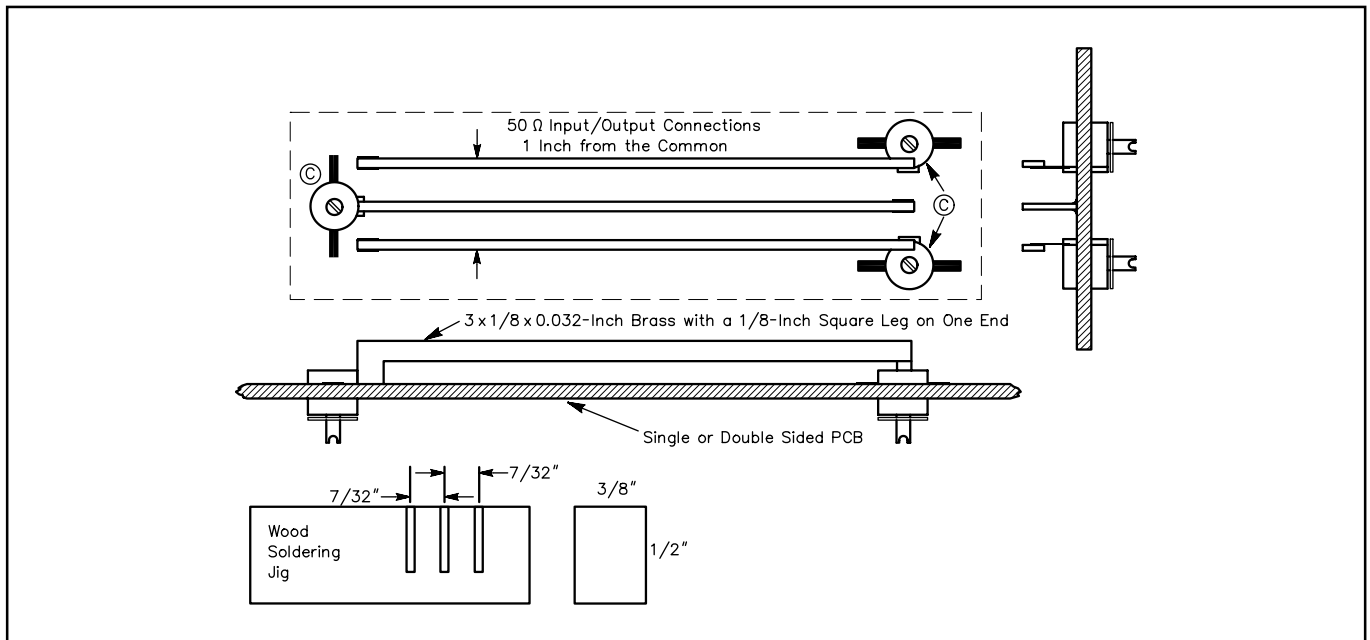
Detail of the UHF filter. The filter is easily assembled using the wood soldering jig to hold the striplines at the proper spacing while soldering. Use a $\frac{1}{8}$ -inch drill placed between the striplines and PC board to ensure proper height above the mounting surface while assembling. The jig slots are made with a hacksaw, which makes the desired 0.032-inch slot width. The devices marked C are 1.6 to 6-pF FILMTRIMS, a Sprague-Goodman plastic-dielectric capacitor (part #GYA5R000). Surplus 2.4 to 9-pF ceramic trimmers also worked well. The local oscillator filter is the same except the input stripline is 1.5 inches long rather than 3 inches long, and the related capacitor, C9, is increased to 10 pF (#GYA10000).
